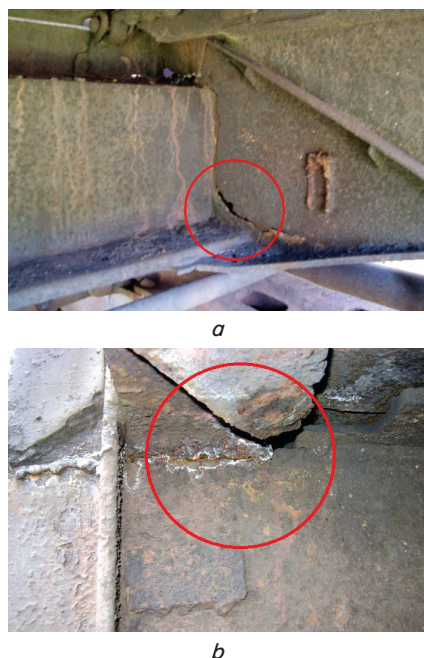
Damage to the body of an open-top wagon at the elevated speeds of collision: *a* – node of interaction between a girder beam and a pivot beam; *b* – node of interaction between a vertical rack and a pivot beam
